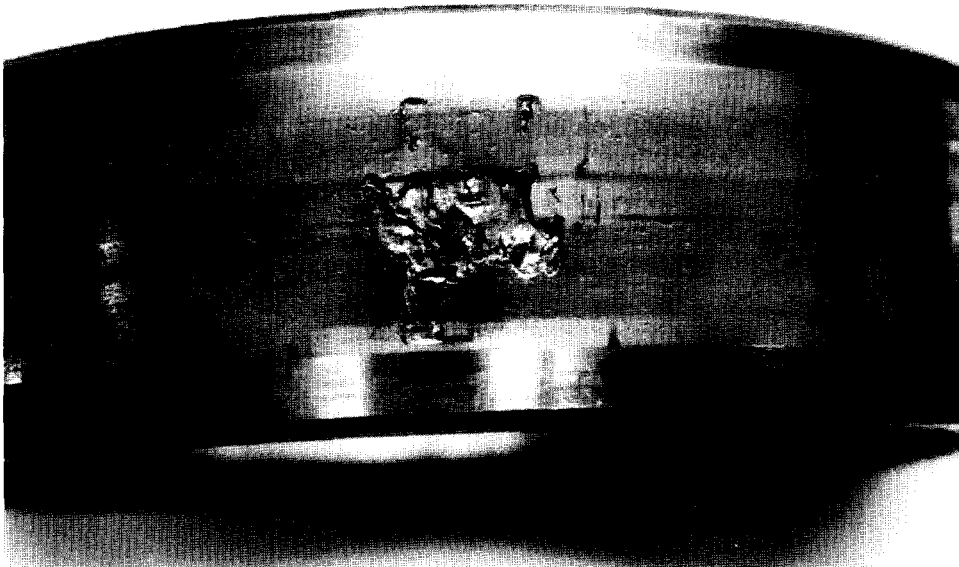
Severe spalling on the inner ring of a thrust bearing.
